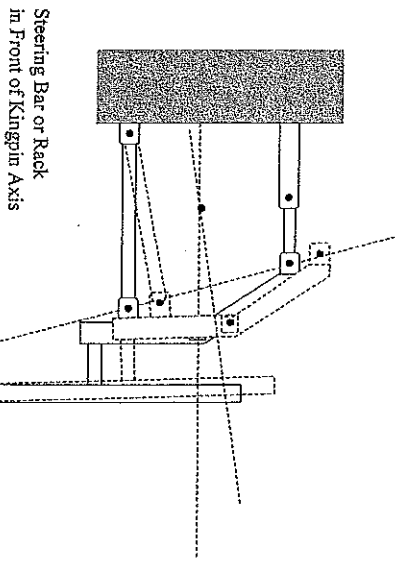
Adjusting the rod length to minimize bump steer steering knuckle in front of front axle.
